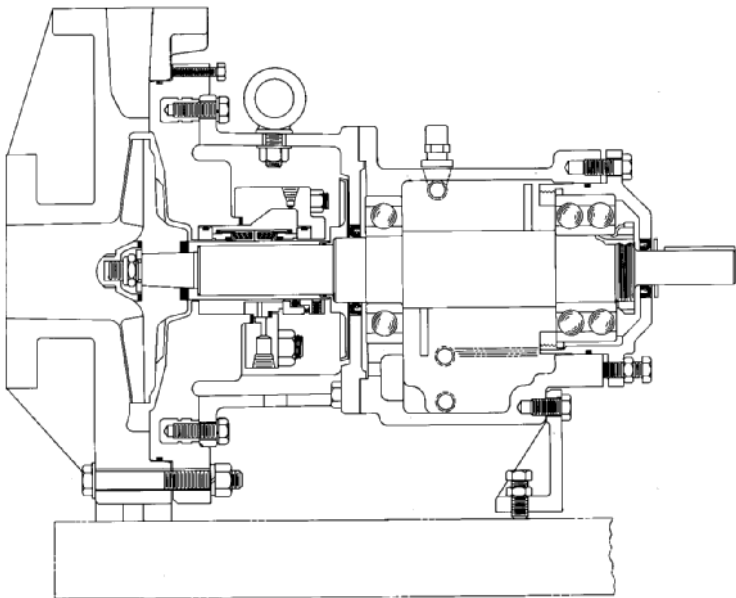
End-suction pump with semi-open impeller (Flowserve Corporation)
